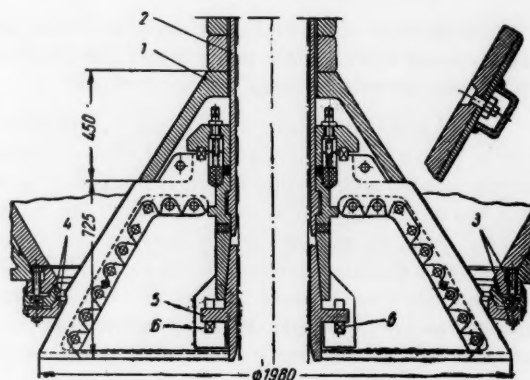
The small bell and hopper with the one-piece, replaceable contacting assembly. Upper right-bracing of the guard plate. 1) Guard cap; 2) shaft of the small bell; 3) tie bolts with nuts; 4) replaceable contact rings; 5) shaft collar; 6) wedges.
